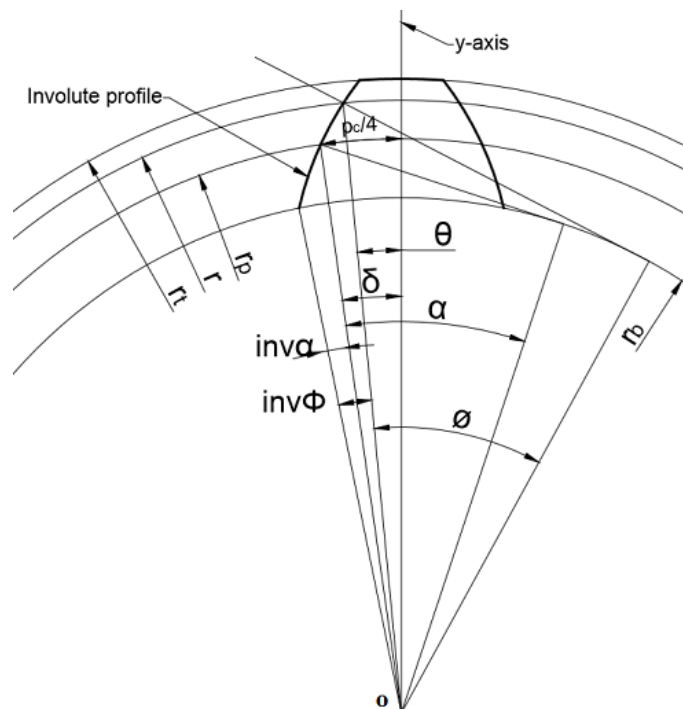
Geometric model of involute symmetric gear tooth profile
